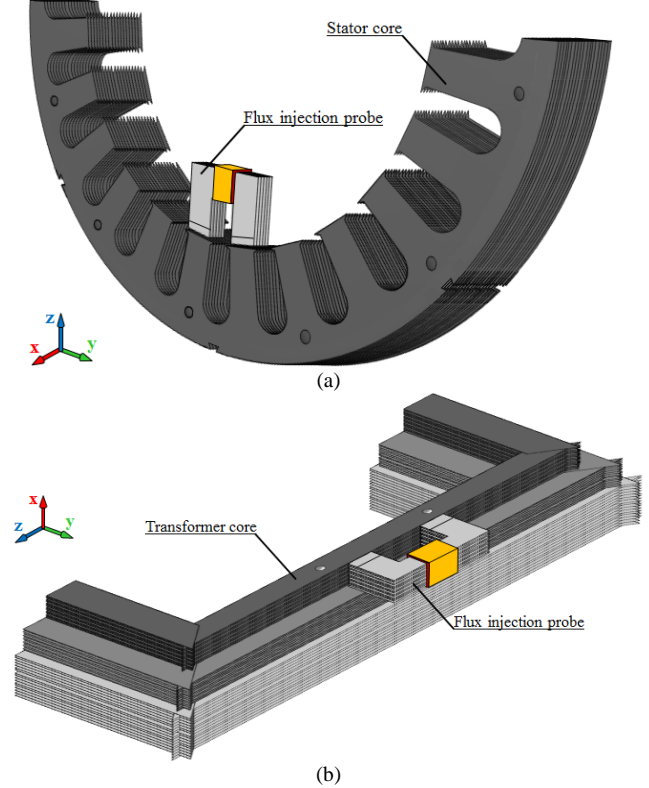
Perspective view of (a) a stator core and (b) a transformer core under test by a flux injection probe
